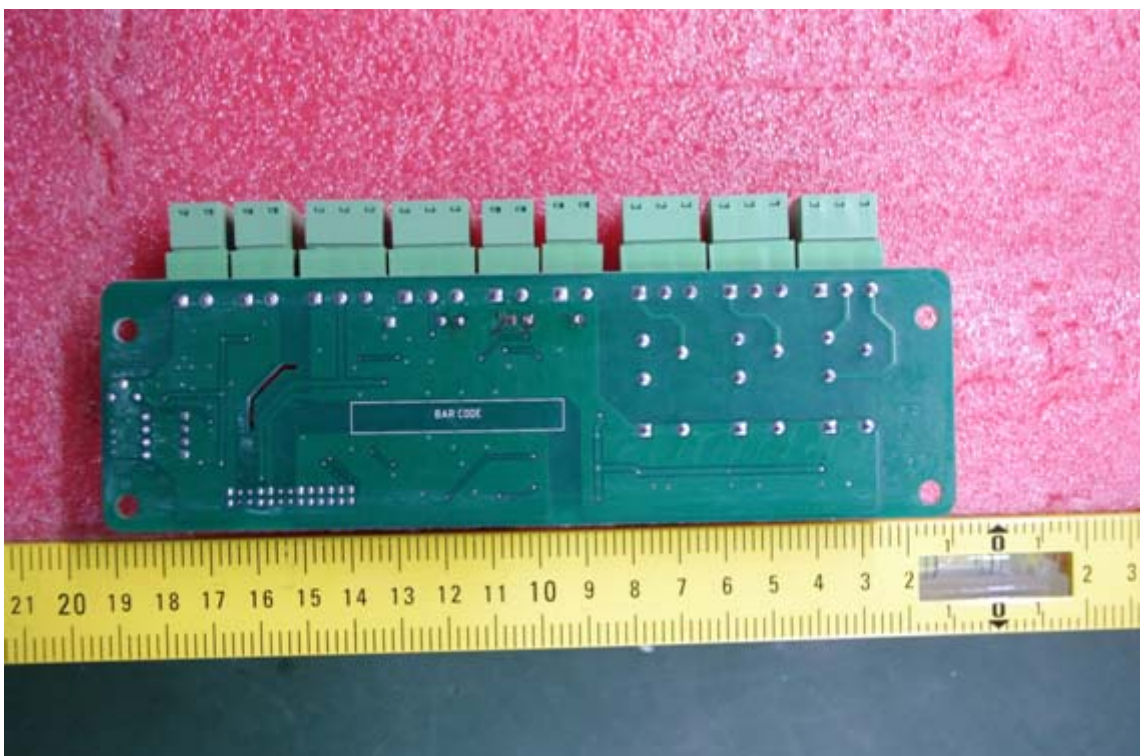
Board SNT\_PCB\_3320\_GJ, traces side view
